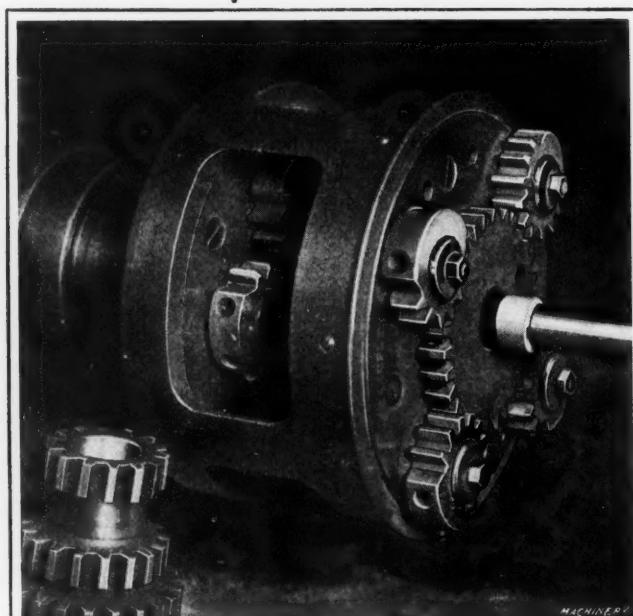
Grinding the Bore of an Automobile Cluster Gear
